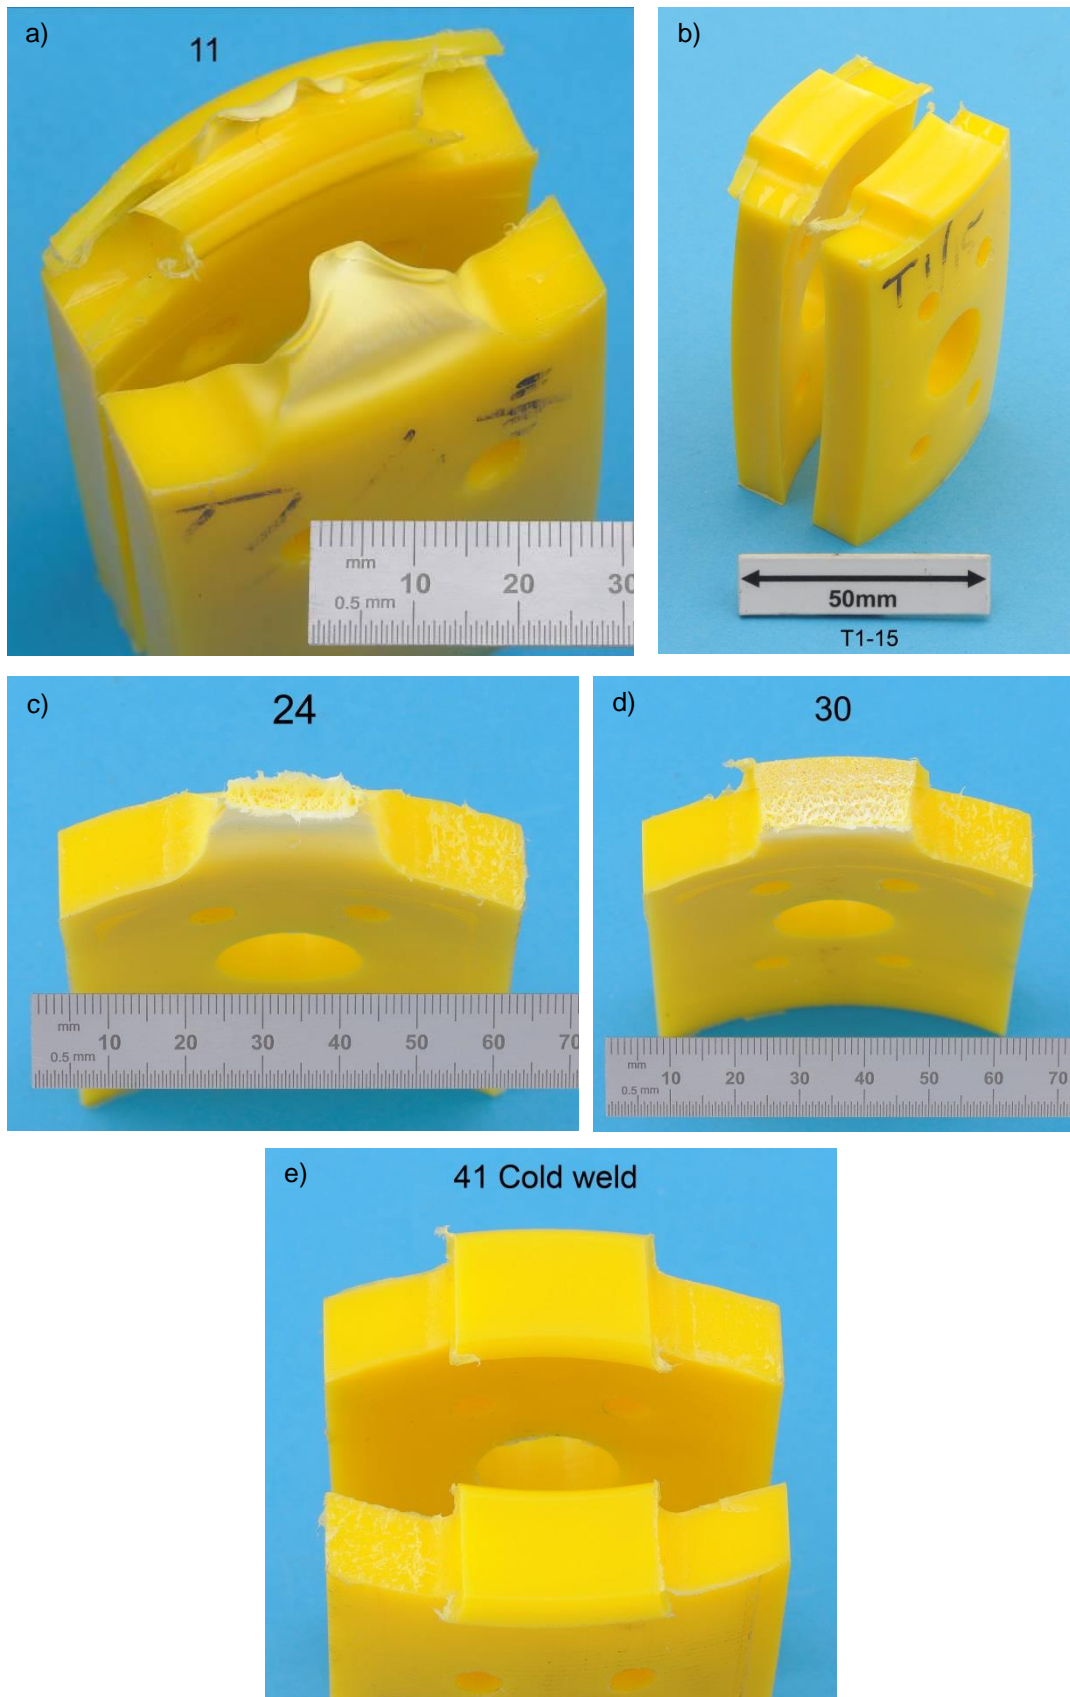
Fracture surfaces of tensile specimens from butt fusion welds in 180mm pipe containing: a) no flaws; b) light talc contamination; c) light sand contamination; d) heavy sand contamination; and e) cold weld.
